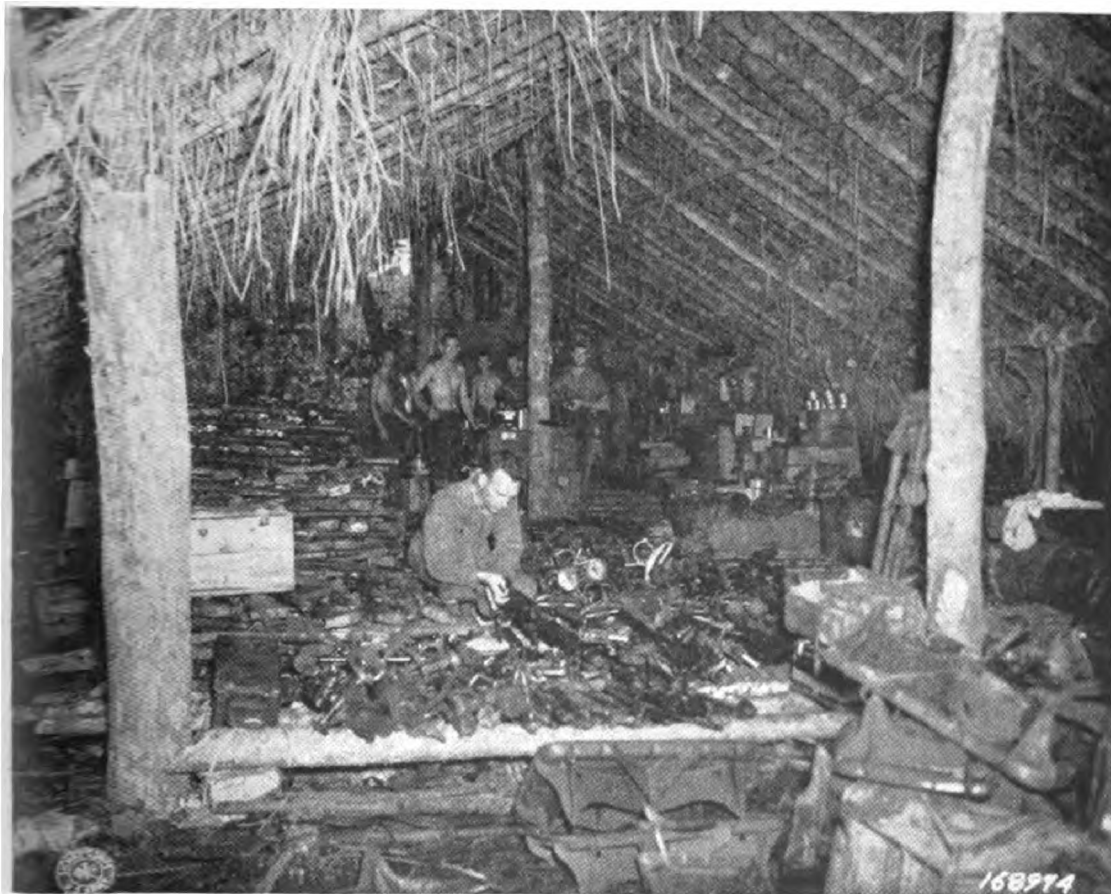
Small Arms Gun and Mount Repair, Showing Improvised Construction of Shop.
